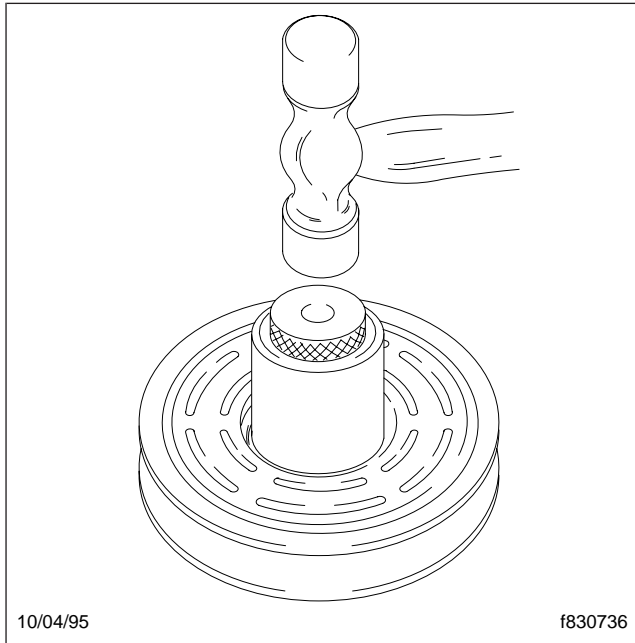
, Drive the Rotor Pulley Down Against the Front Housing Step
